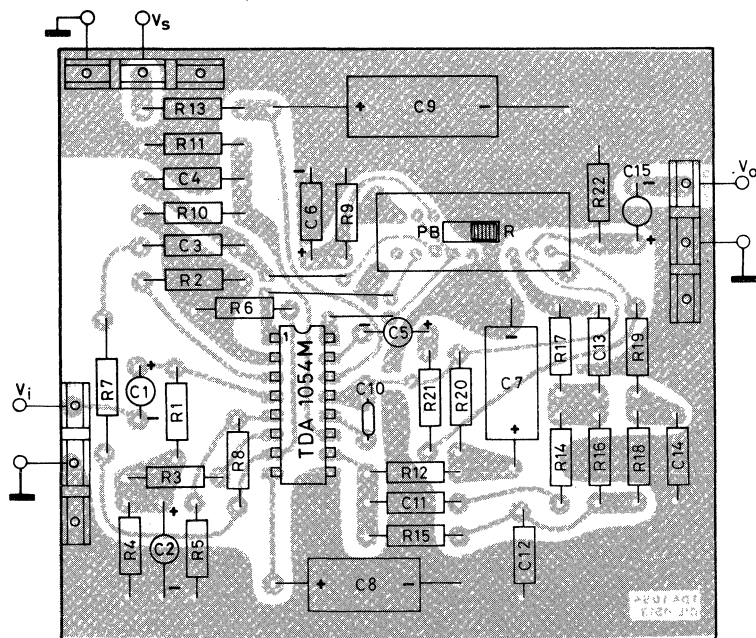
P.C. board and component layout for the circuit fig. 9 (1:1 scale)
